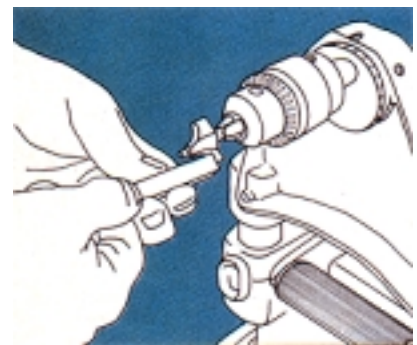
Drill chuck mounted on tailstock chuck arbor to hold router bits while sharpening.
